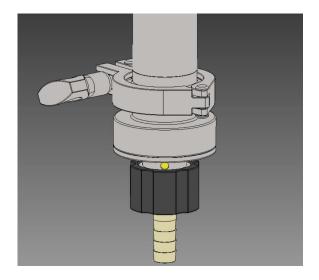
SAMPLE VALVE IN OPEN POSITION
